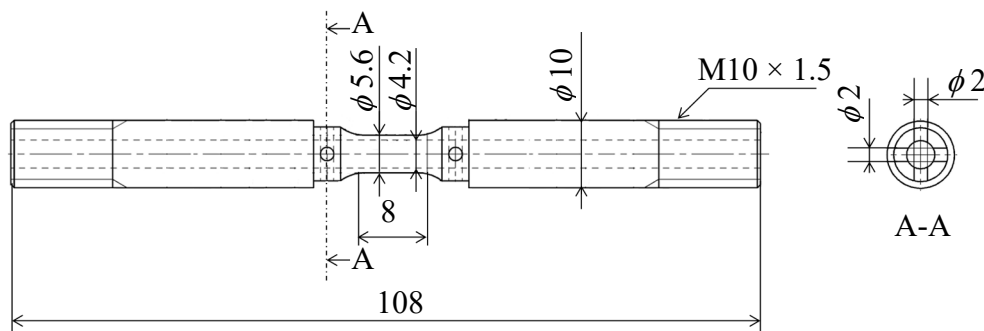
Shape and dimensions of tensile specimen (unit in mm).
